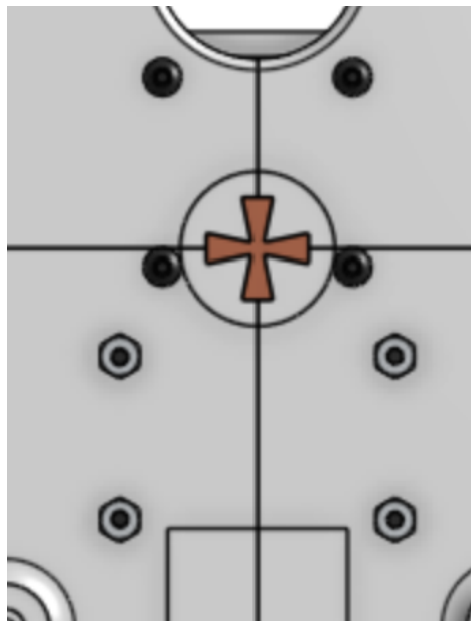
Underside view of the base showing bolt heads and the center dovetail key.
